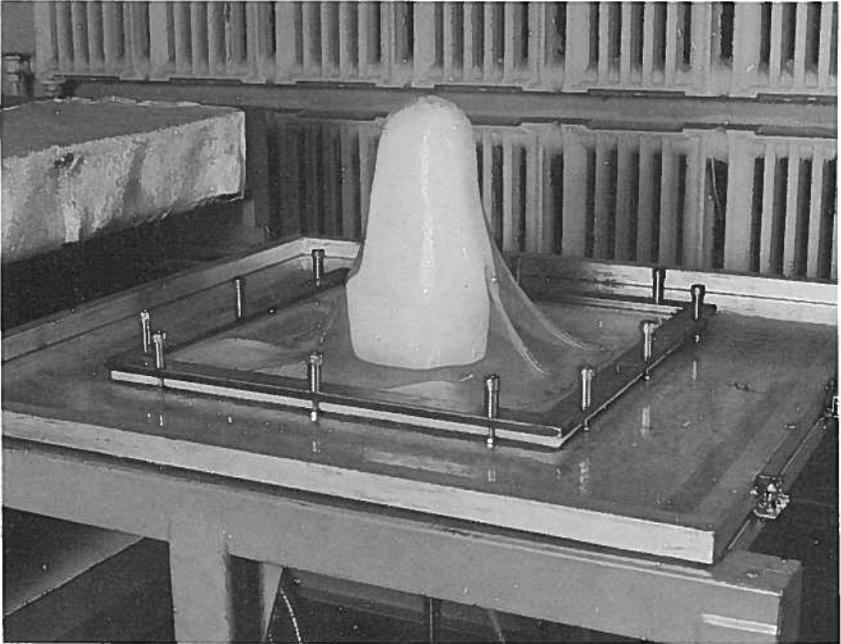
Vacuum forming the conical shape of the thigh stump.
